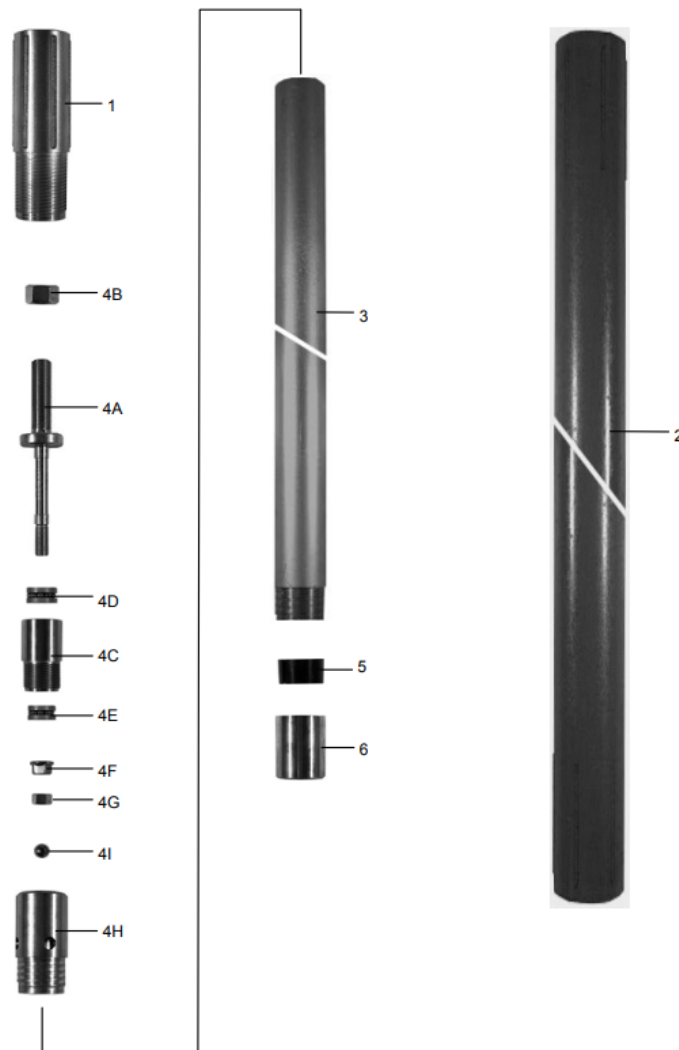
The core barrel components seen in an exploded view from the American Diamond Tool catalogue. 1: Core Barrel Head, 2: Outer Tube, 3: Inner Tube, 4: Bearing Assembly, 4A: Bearing Shaft, 4B: Adjusting Locking Nut, 4C: Bearing Retainer, 4D: Thrust Ball Bearing
